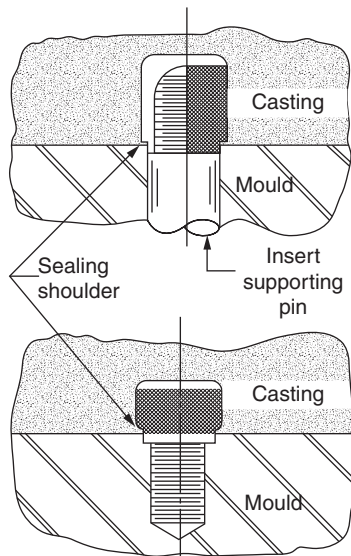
Female inserts which are open at both ends should be designed to have an axial tolerance of plus 0.025 mm to 0.050 mm, compared with the part. This precaution will help to keep the plastic compound from entering the thread.
